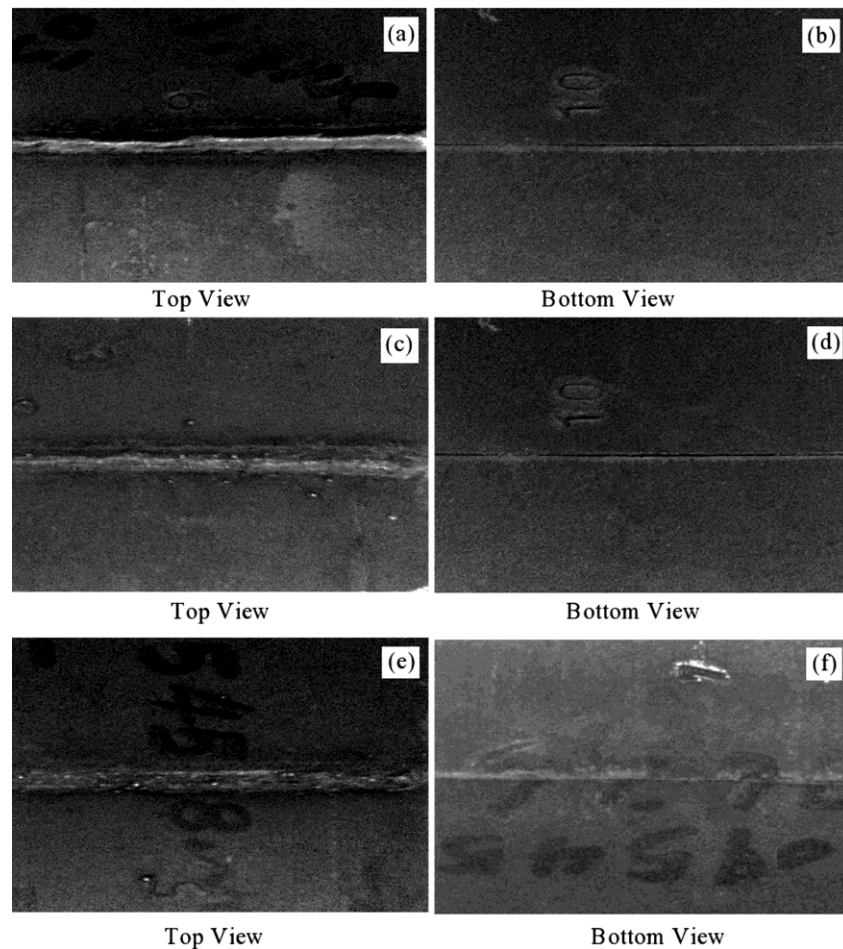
Typical weld joint appearances: (a&b) MIG welding, (c&d) laser remelted MIG welding (Power: 400 W), (e&f) laser remelted MIG welding (power: 600 W).
